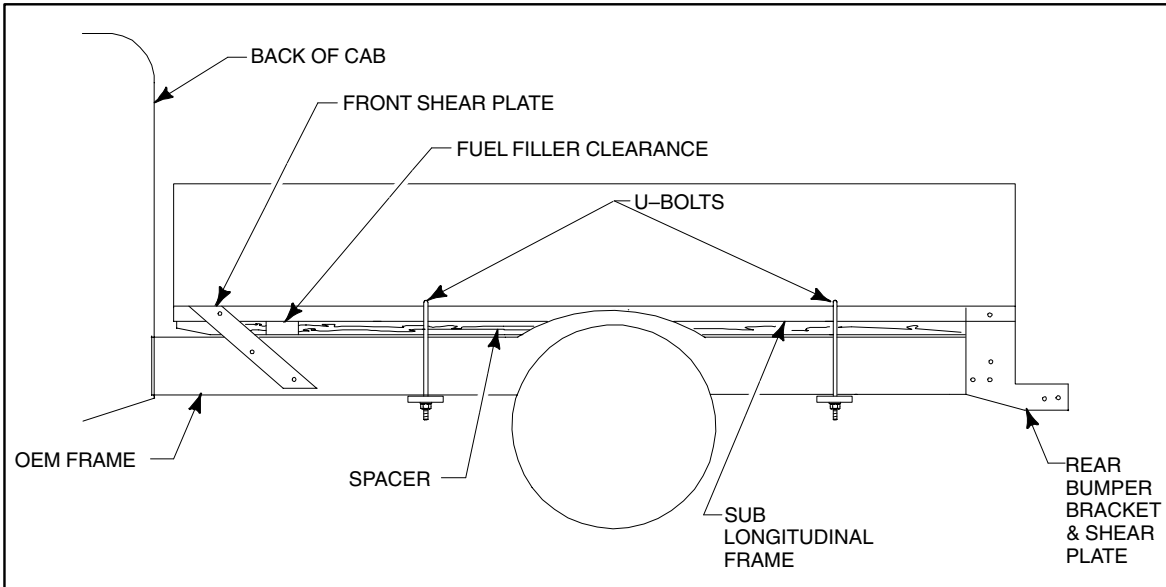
FIGURE D - SUPER DUTY F-SERIES SUB MOUNTING TECHNIQUE #4
